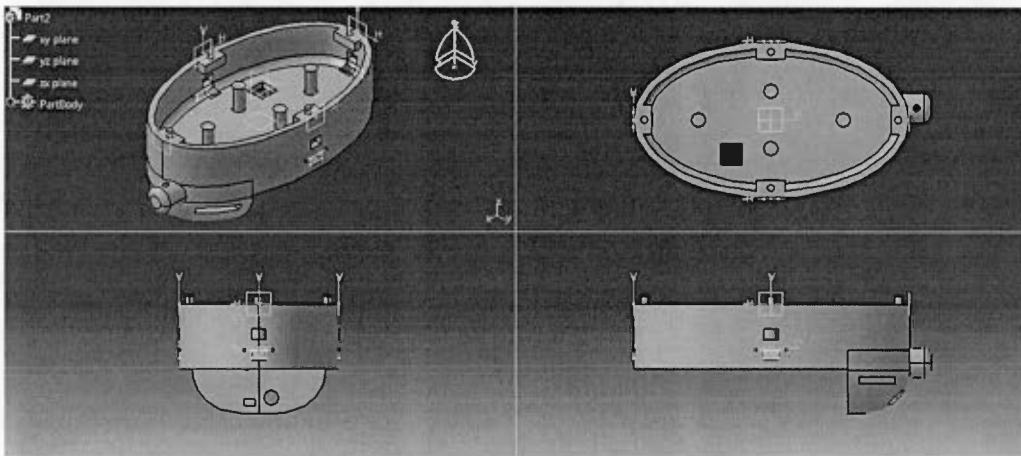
Modified PAS concept design third part 4 side view
